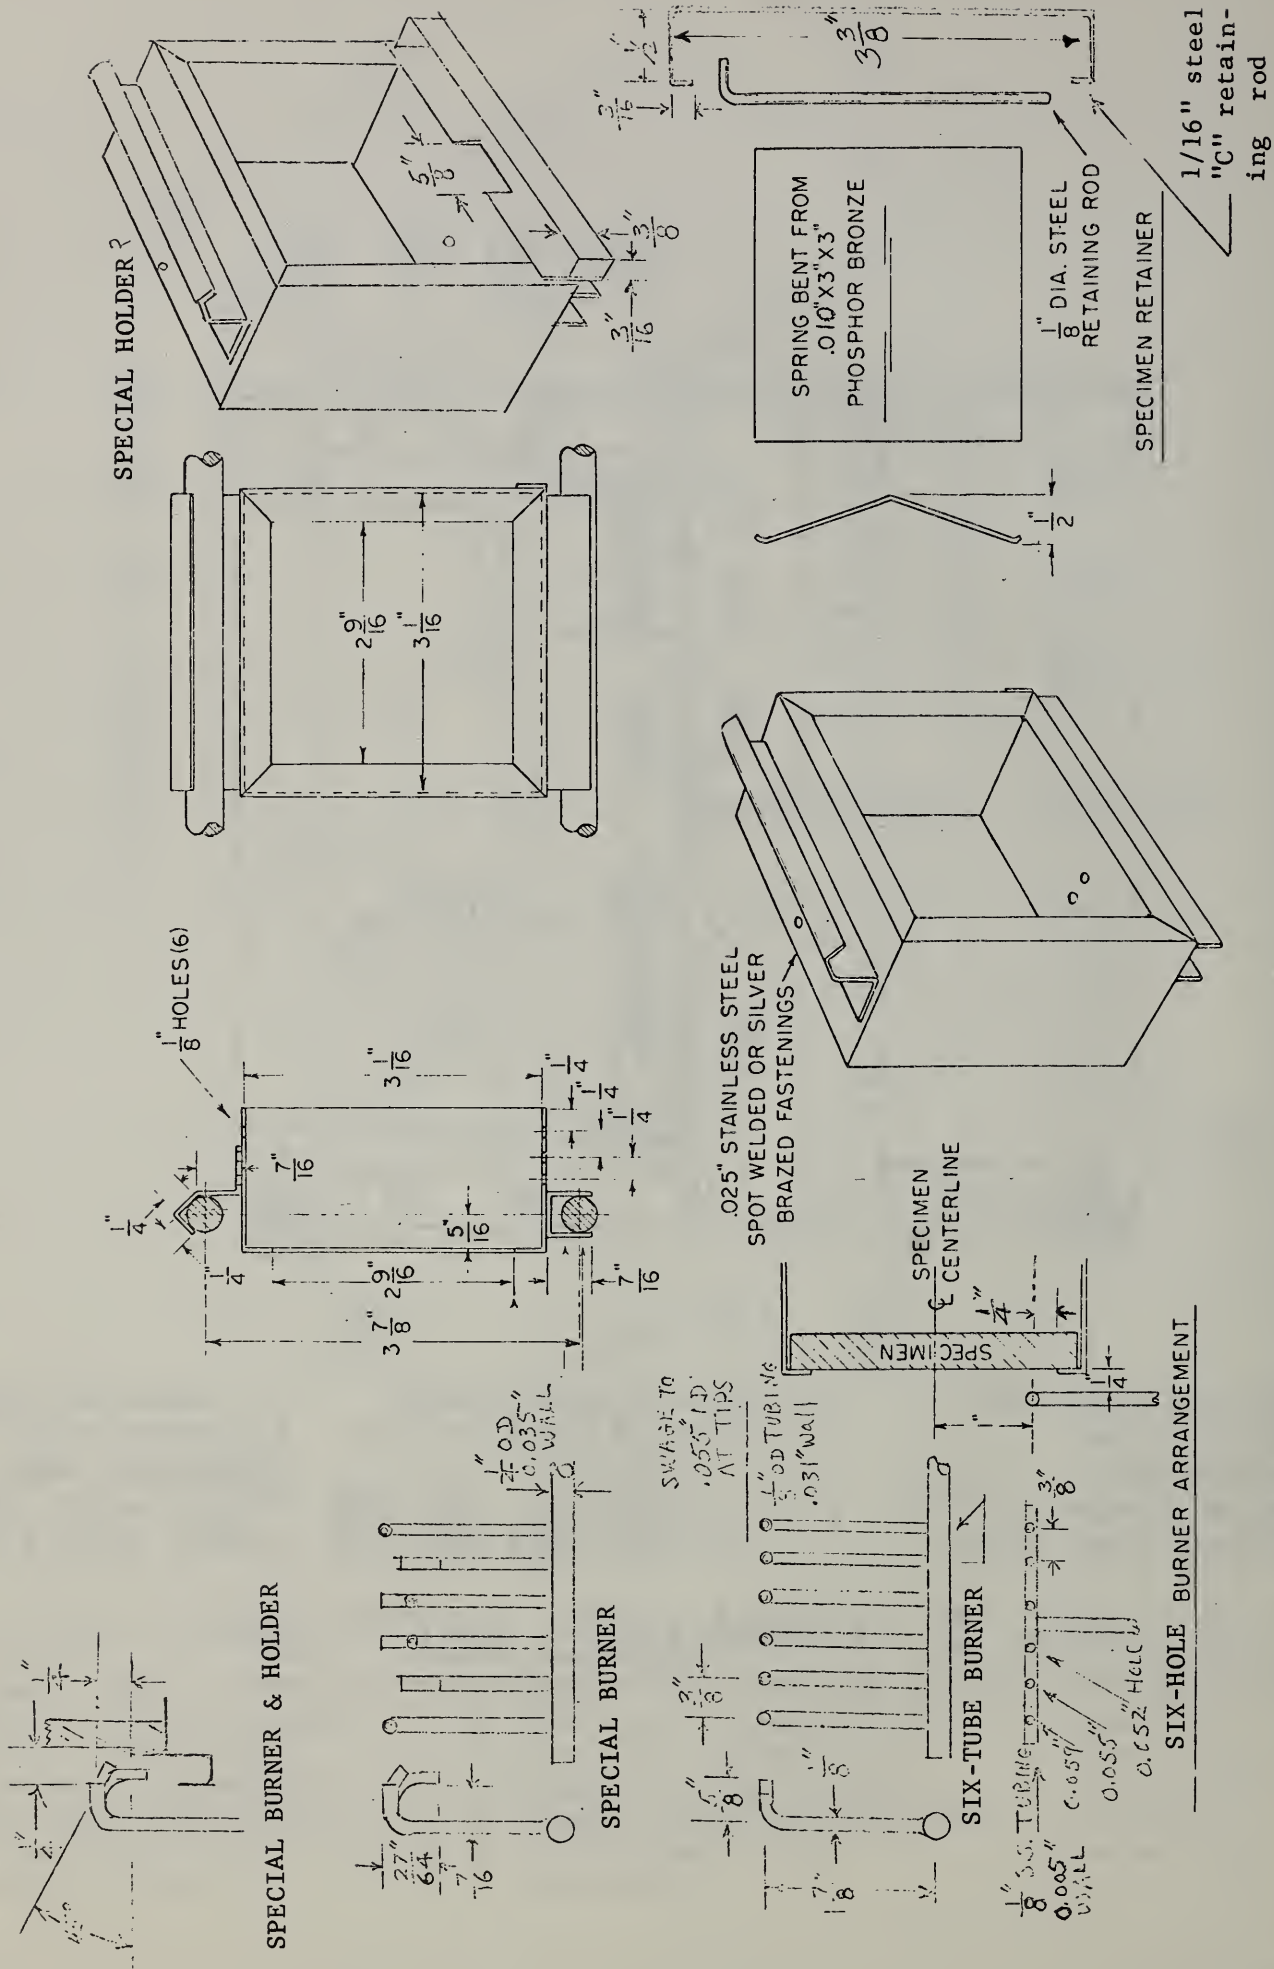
DETAILS OF SPECIMEN HOLDER AND PILOT BURNER
